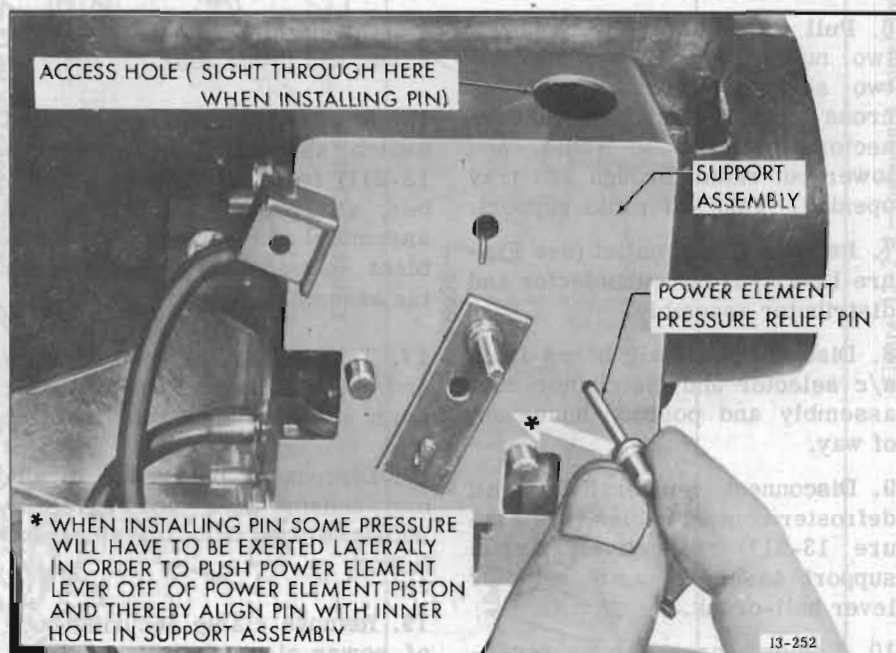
Installing Pressure Relief into Support Assembly (49000 Series)
